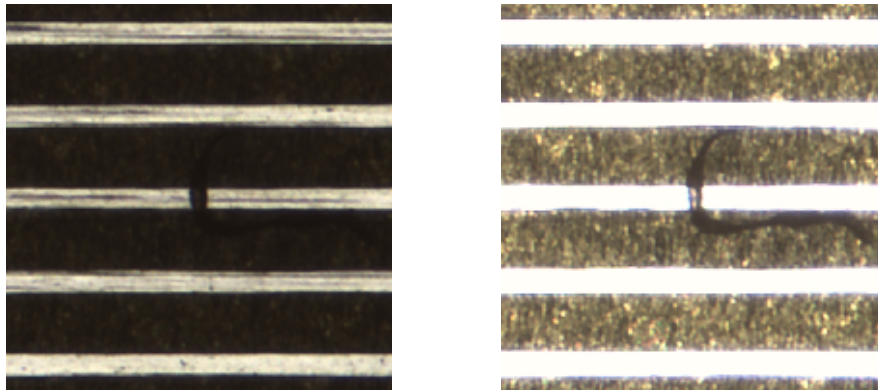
The original (left panel) and processed (right panel) image of the cable metal surface defects.
